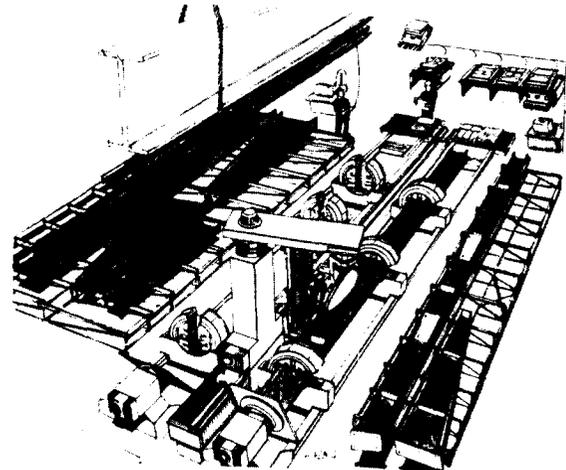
Automated handling, tacking and welding of large Workpieces
